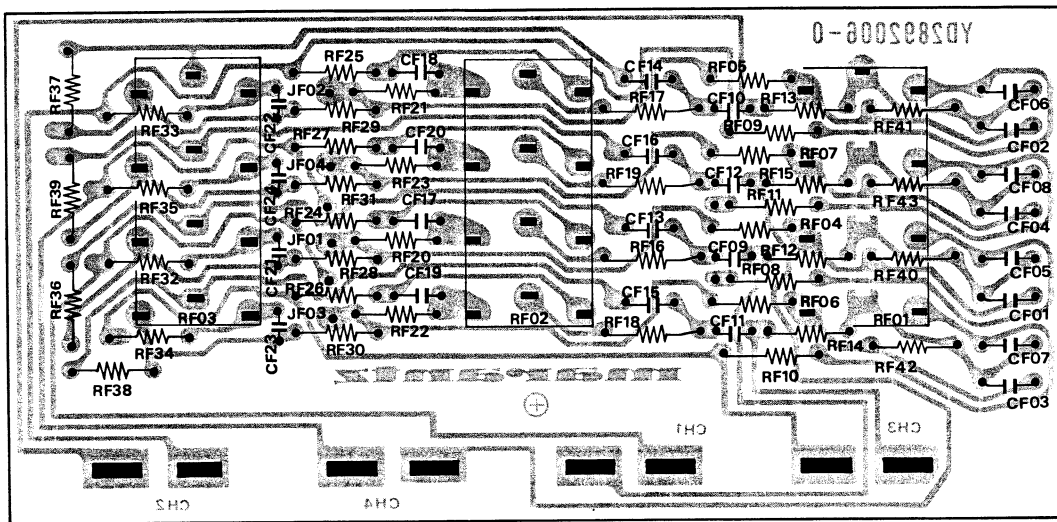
Tone Control Unit Assembly PF01 Component Locations
